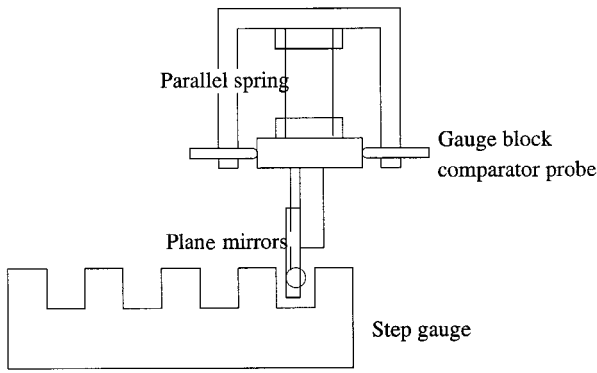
Probe consisting of plane mirrors, Br-Cu parallel springs and gauge block comparator probes.
